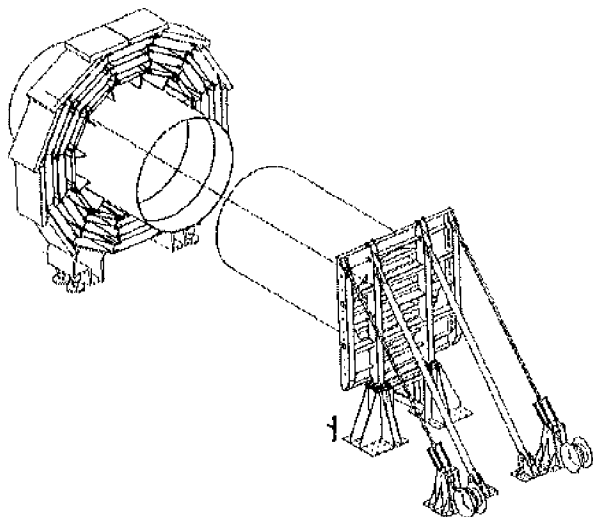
Perspective view of the coil in a cantilevered position. The central barrel ring, equipped with the outer shell of the vacuum tank is ready to be slid, using heavy duty air-pads†, over the coil
